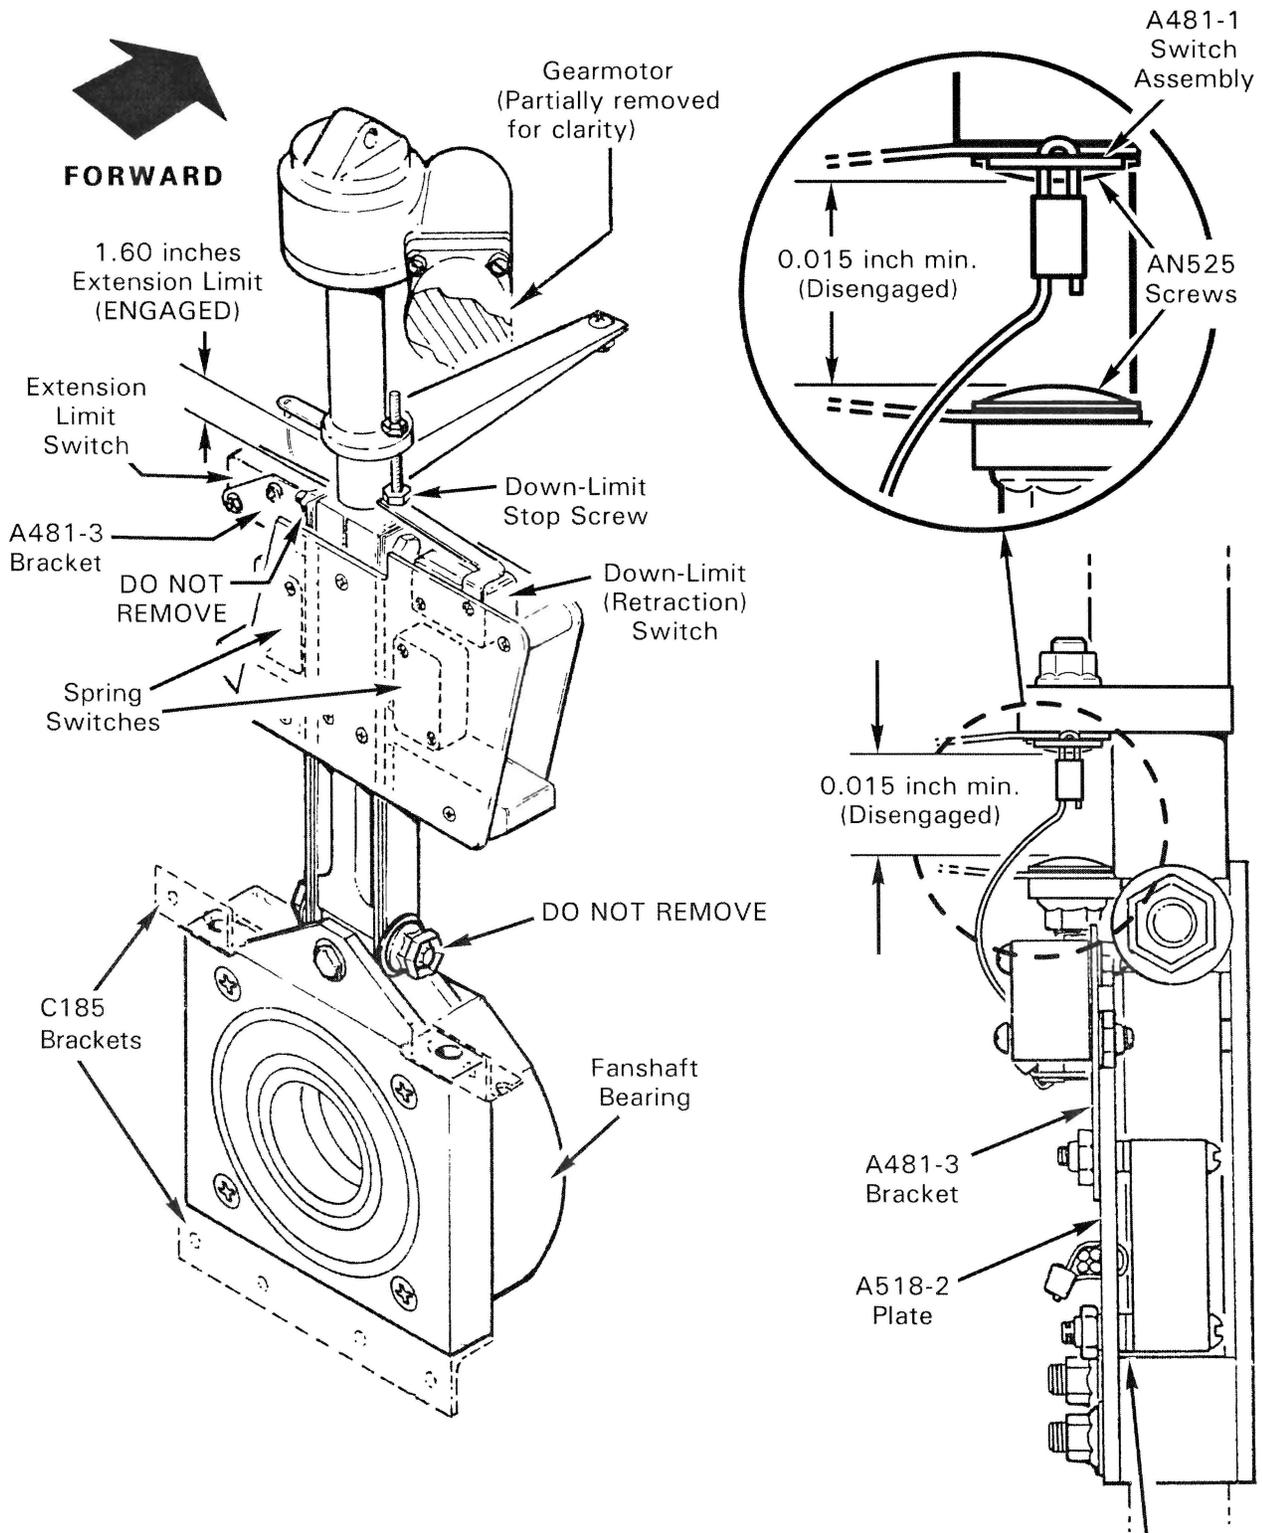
ACTUATOR LIMIT SWITCHES
